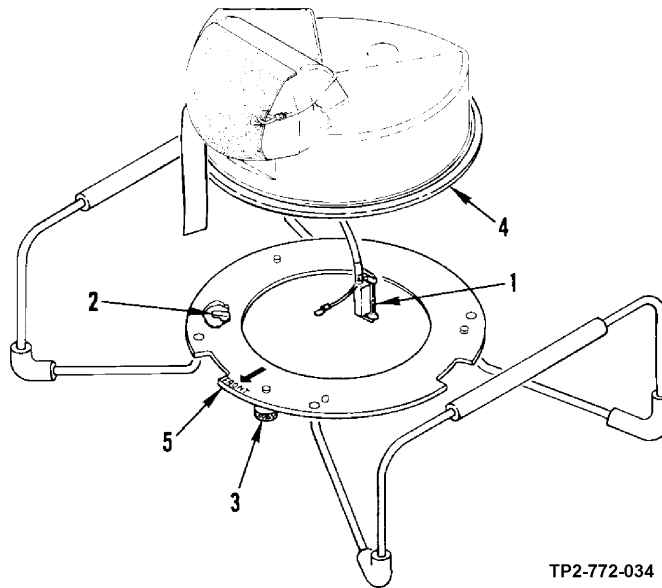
PNVNS Turret Removal from PNVNS Holding Fixture
